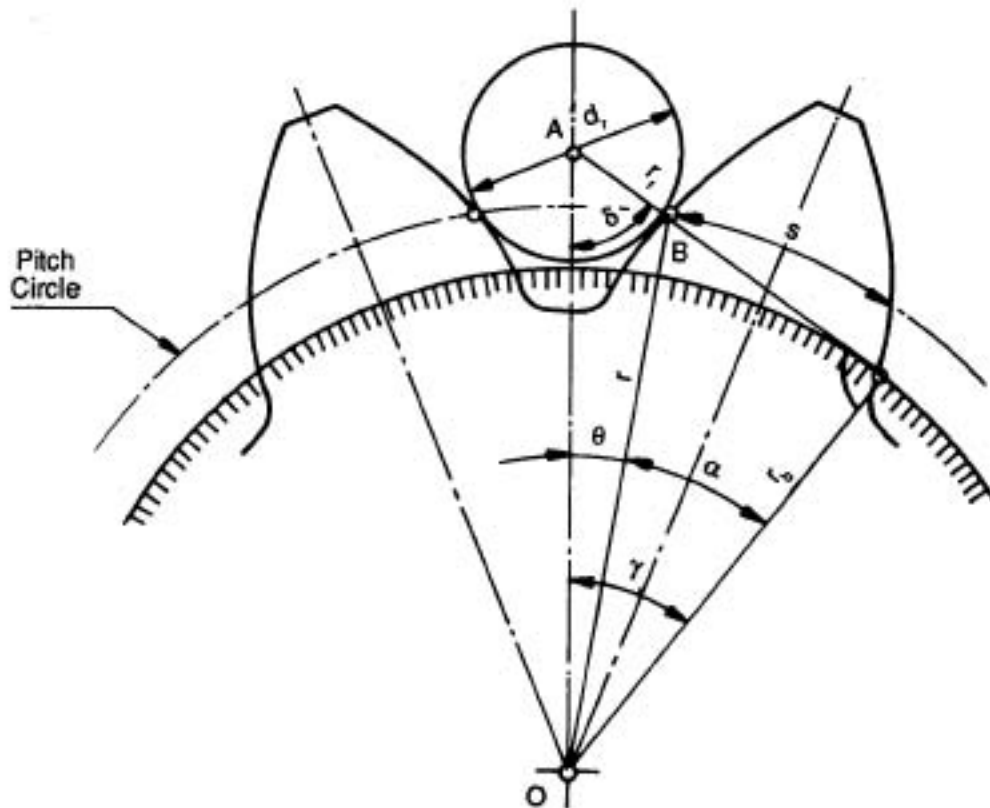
Measuring ball which touches the tooth surfaces at the pitch circle
